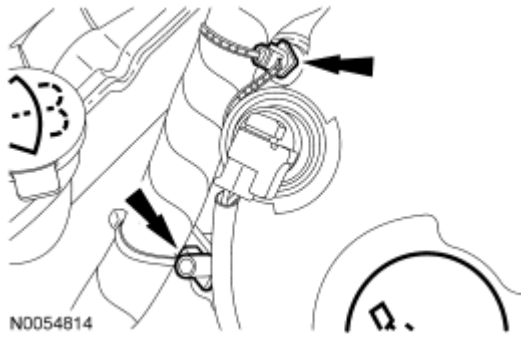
Identifying Wiring Harness Retainers From LH Valve Cover Stud Bolts
